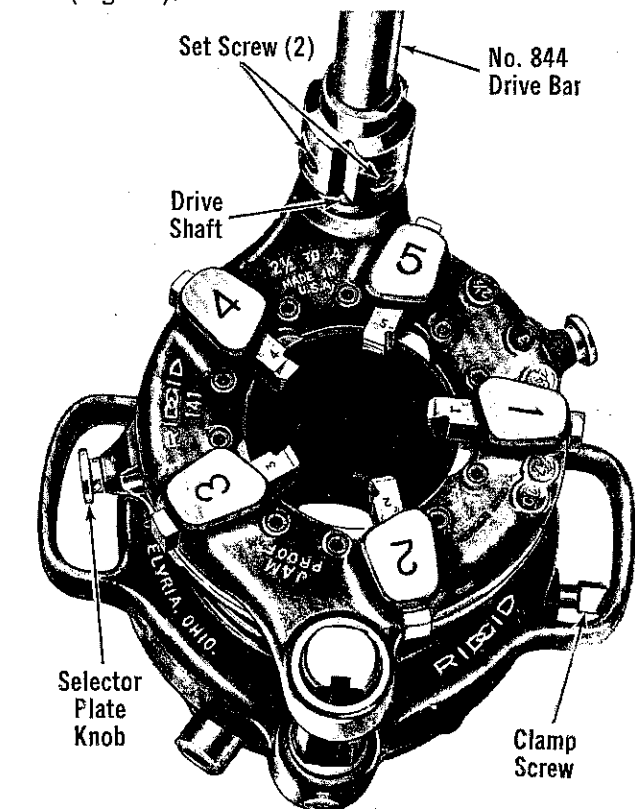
No. 141 Threader with No. 844 Drive Bar Installed (Nos. 161 and 4PJ Threaders Similar)
